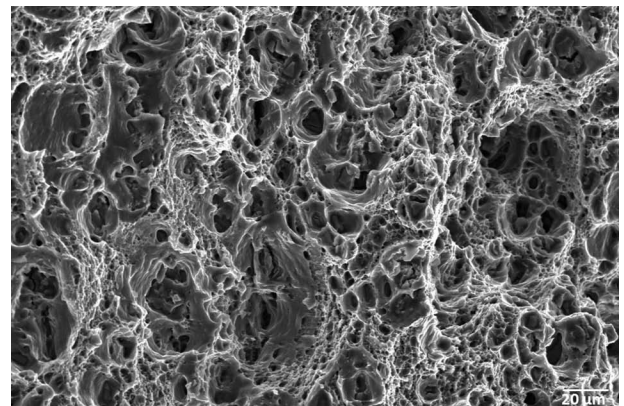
High magnified image of the fracture surface shown in Fig. 169
